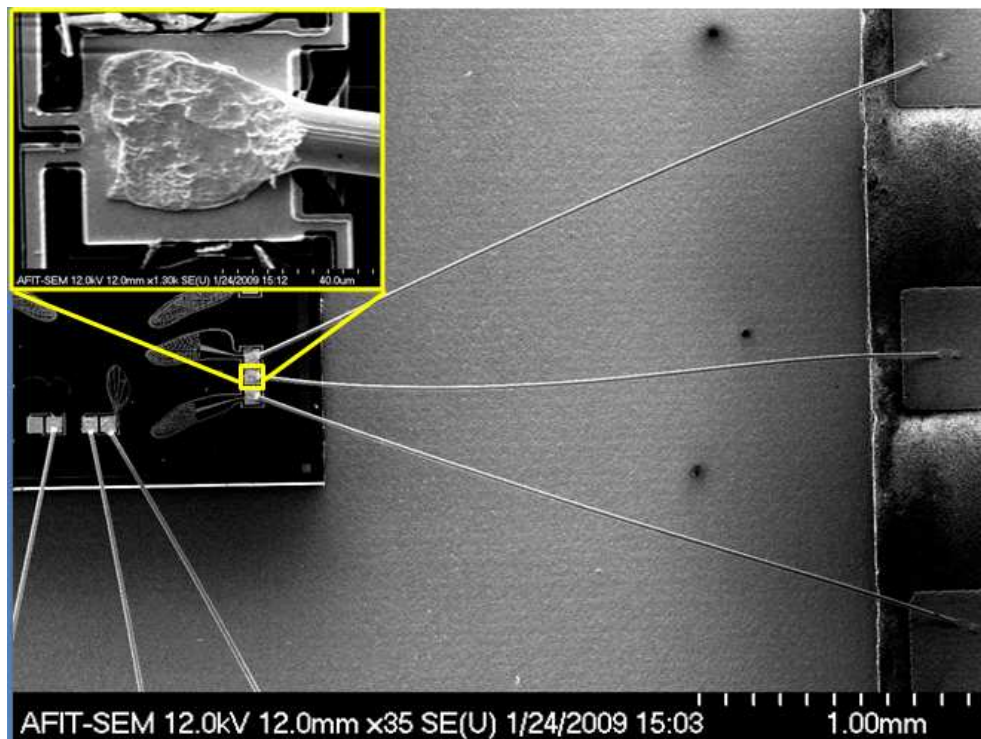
Extended path large dragonfly test wings wire bonded out to a chip carrier. The close-up of the ground pad shows a wedge type bond which was used on both the device and chip package side of the wire bond.
